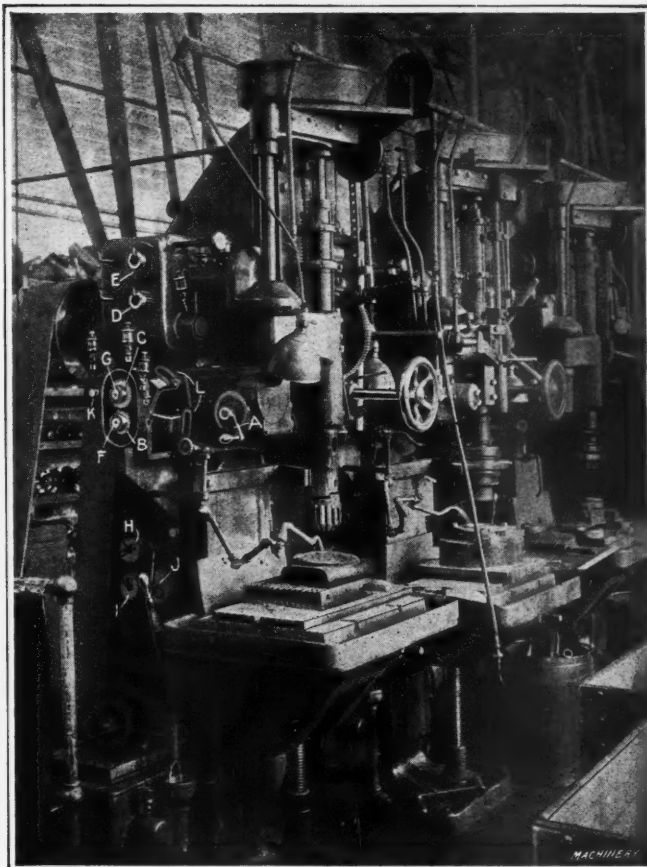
Arrangement of Special Gears introduced into Feed Train to provide for performing Threading and Tapping Operations
